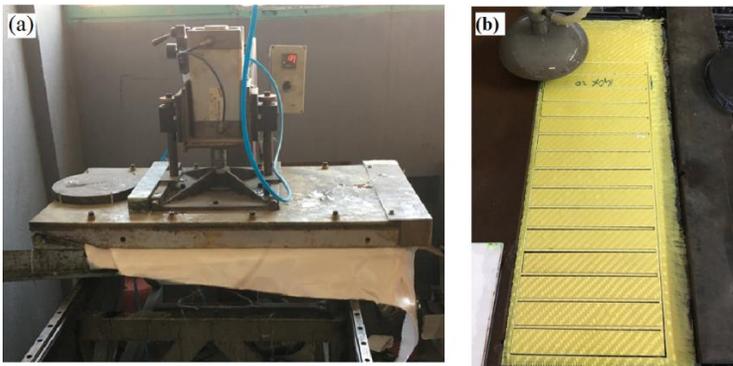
Hot molding press (a), waterjet cutting of kevlar/epoxy (b).
